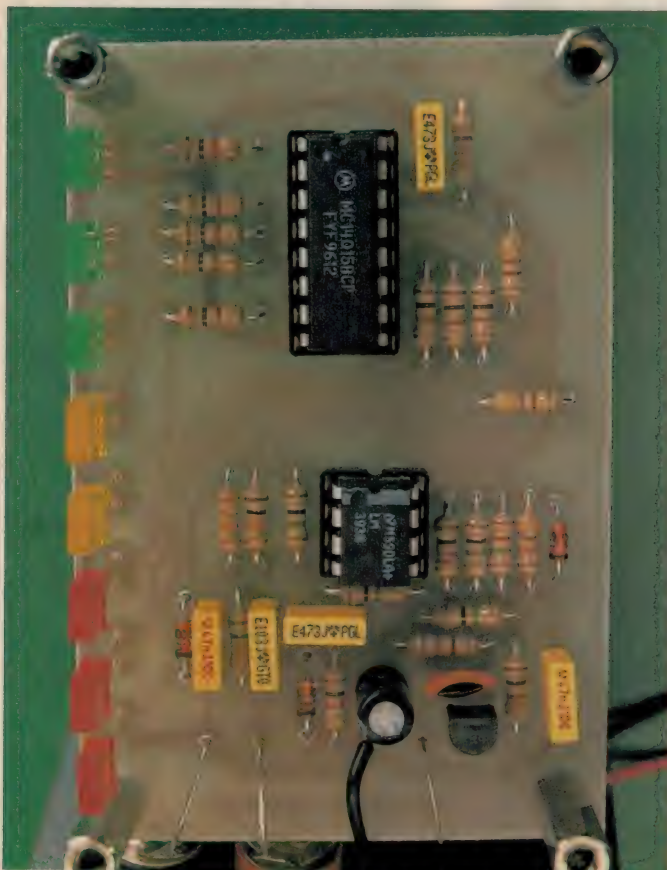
Use this PCB overlay and the facing photo as a guide in assembling the tester.
